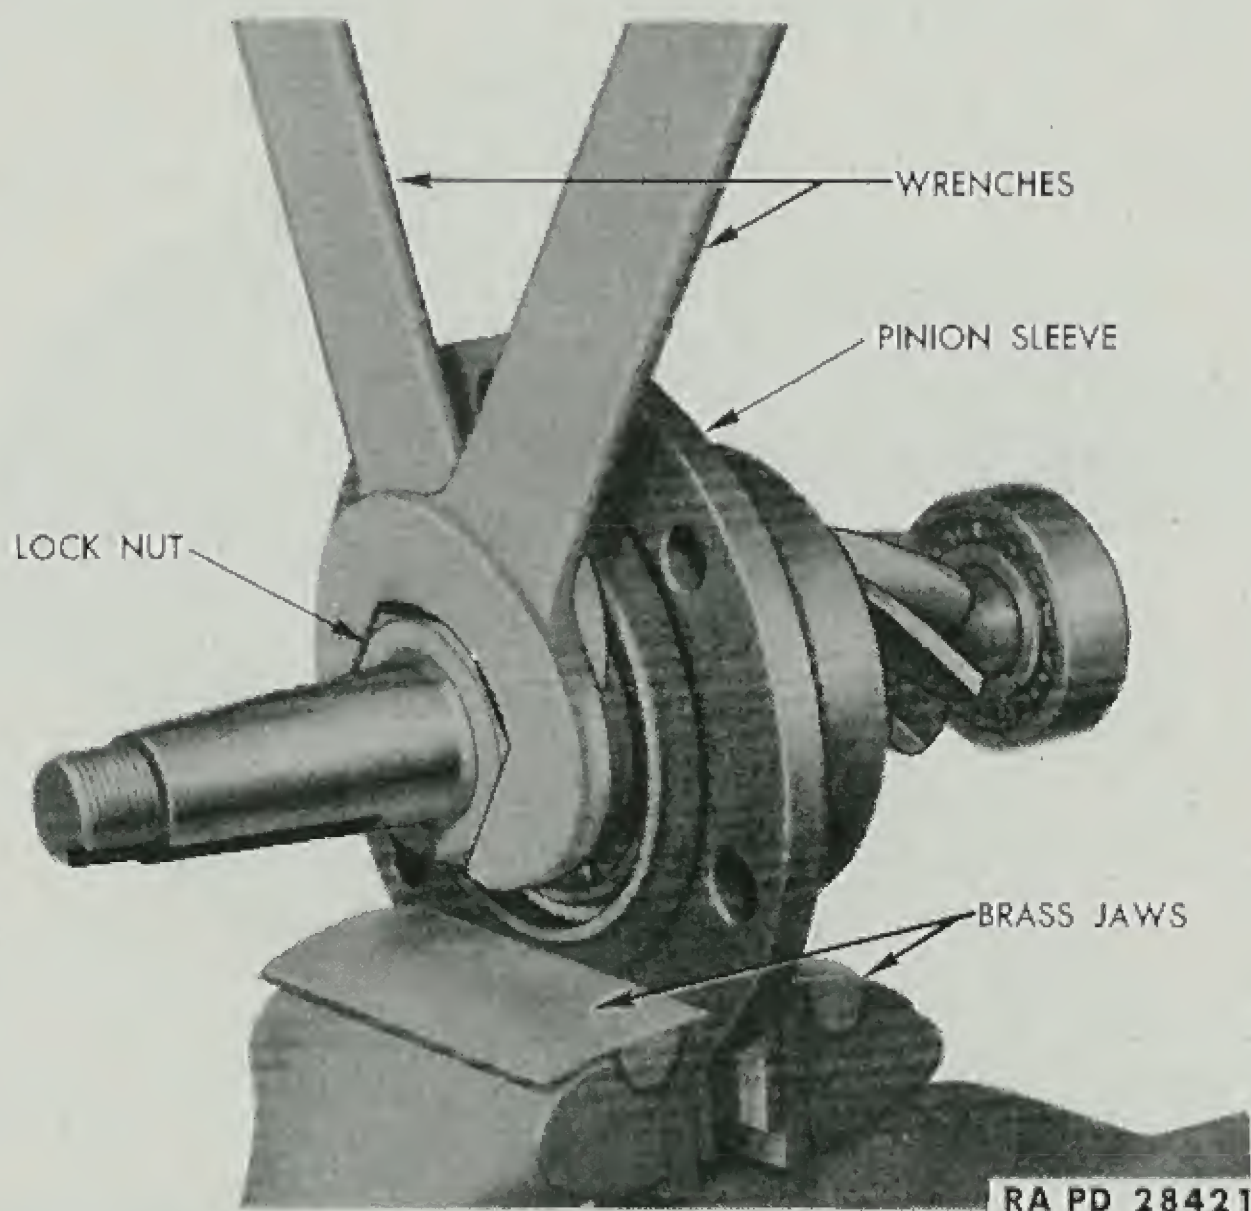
Removing Pinion Shaft Adjusting Nut and Lock Nuts with Wrench 41-W-1470-100
